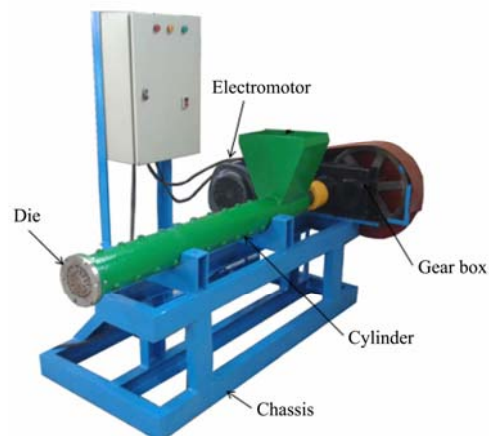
Single-screw extruder designed and manufactured in the University of Tehran
